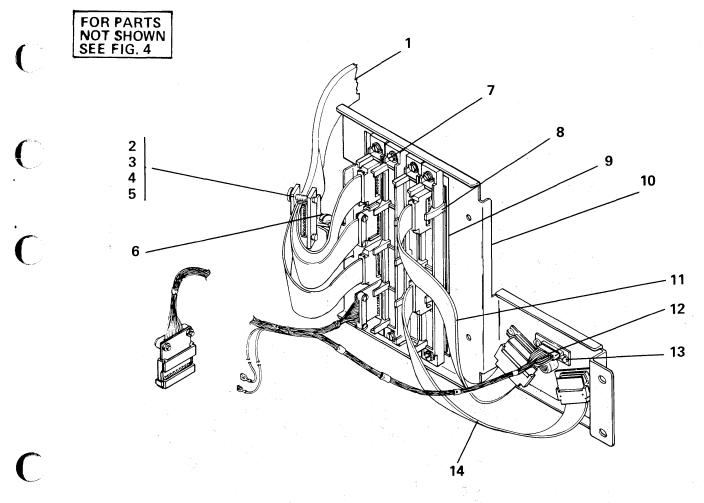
CIRCUIT BOARD ASSEMBLY. SEE LIST 10. (BEFORE EC 835505)
